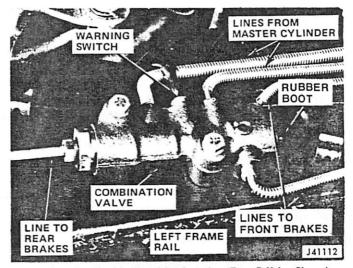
G-16 Combination Valve Location (Type-D Valve Shown)
